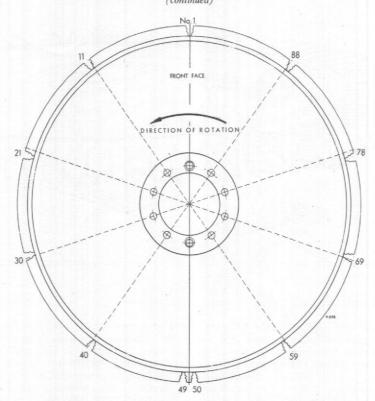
Diagram to indicate method of identifying No. 1 turbine blade when the marking on the disc is obscure.
